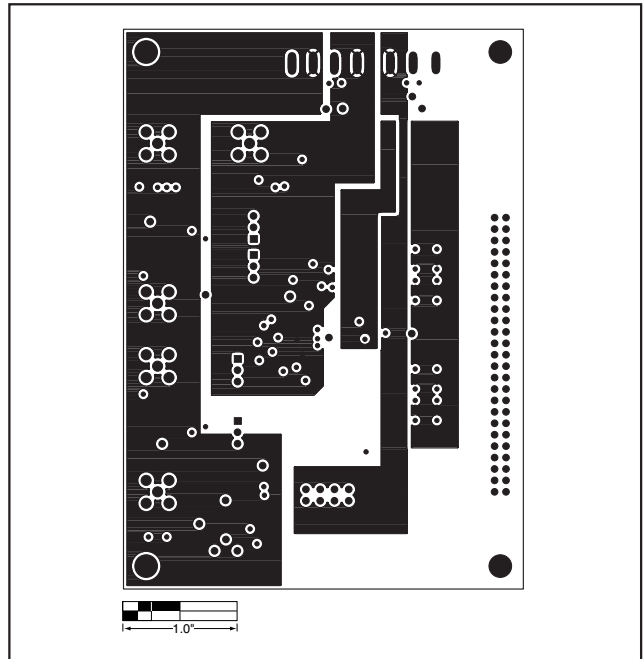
MAX1181 EV Kit PC Board Layout—Power Planes
